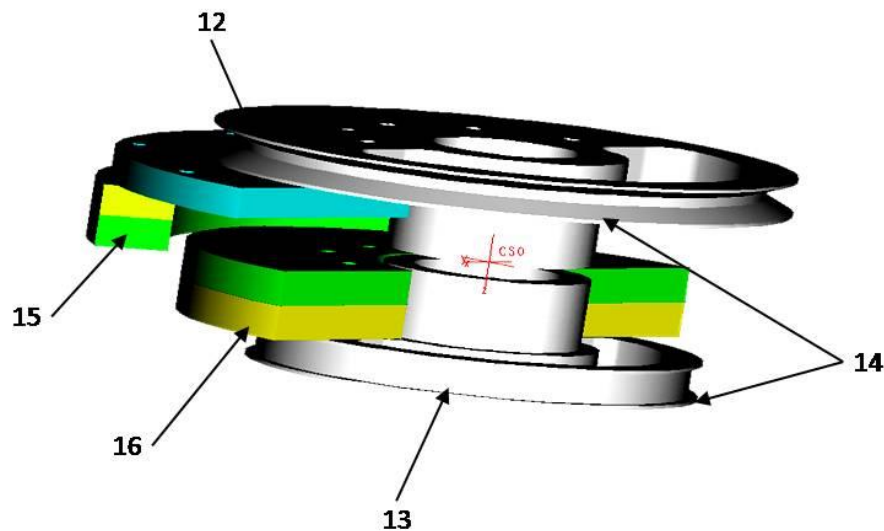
Typical stacked eccentric mass counter rotating energy-wheels system. The v-belt wedge drives the upper sheave, loops around an idler sheave and drives the lower sheave with the belt back, thus producing counter rotation. Weights are bolted to eccentrics to increase force.
